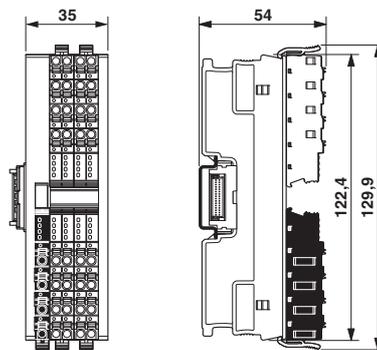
Nominal dimensions of the H housing with two terminal fields (type 2H)
